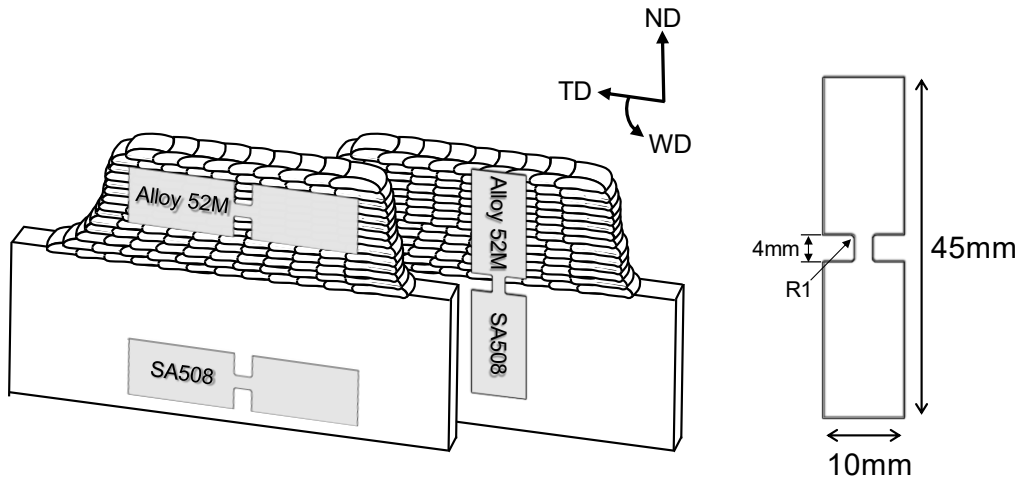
Location of tensile test specimen and dimension of specimen[105]
